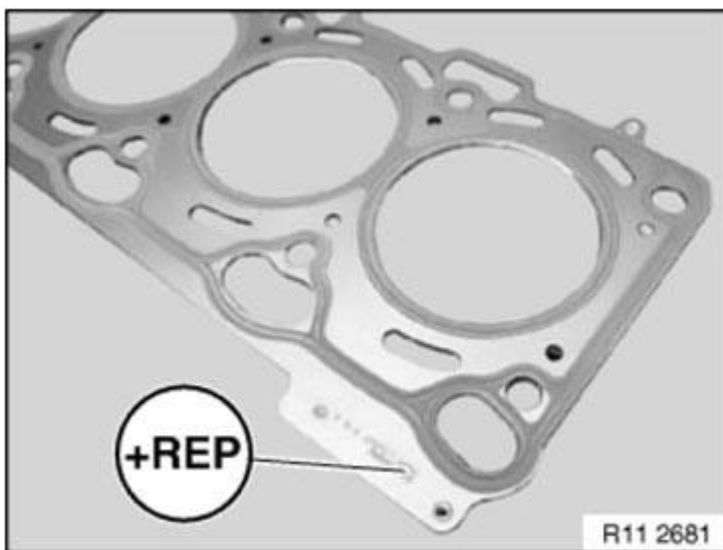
Identifying Cylinder Head Gasket (+REP)
